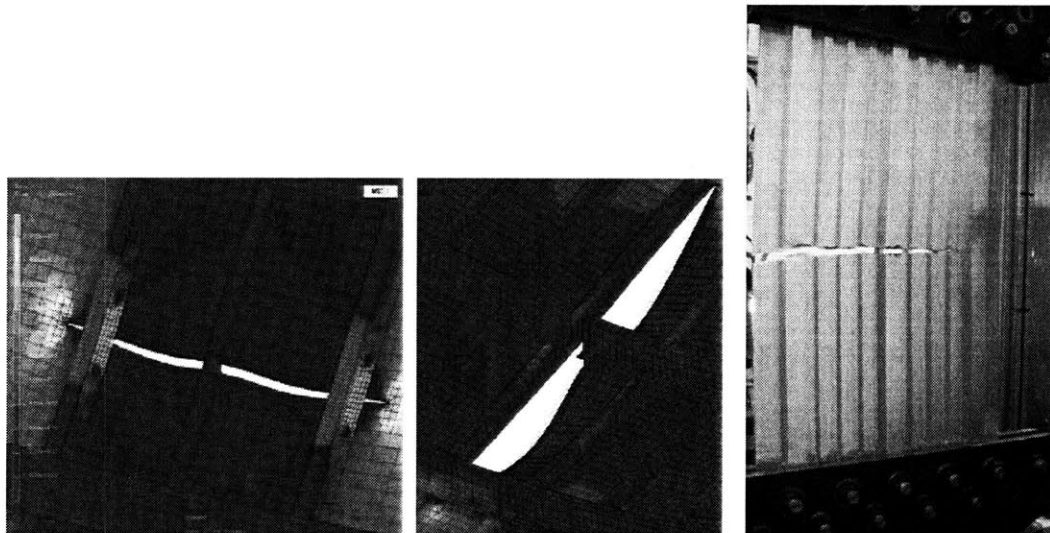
Finite element modeling of two stringer bay cracks (left), two frame bay cracks (middle), and actual tests on 2027 T351 lower wing skin alloy (right) [188]
